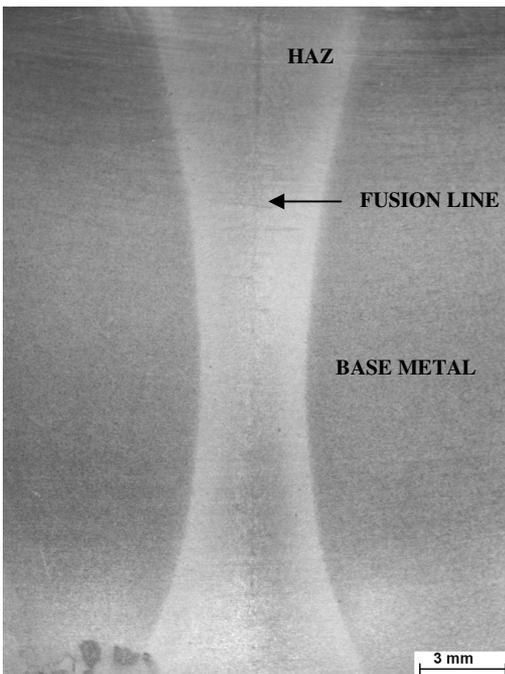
Cross section specimen of the weld (24" X 25mm X60, as weld condition)
